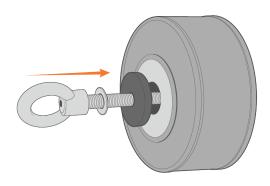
Insertion of threaded rod through BAL-x and cage or buoy frame.
